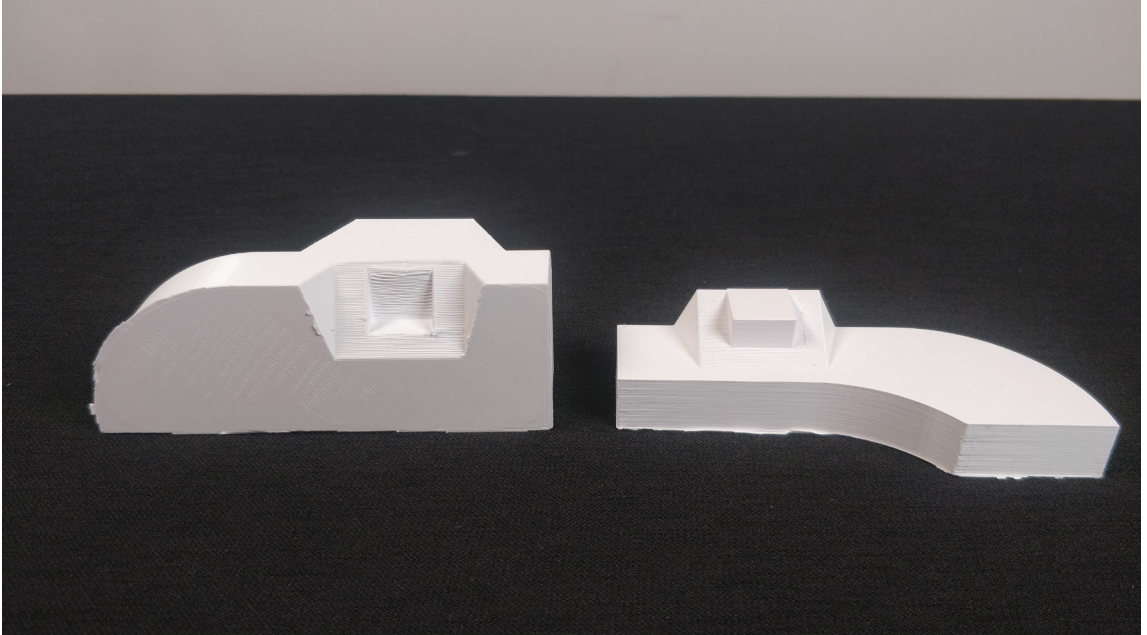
3D PRINTED STACKING SYSTEM PART 3
